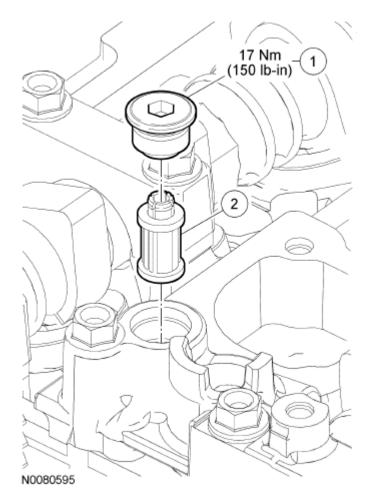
Identifying Variable Camshaft Timing System Oil Filter
